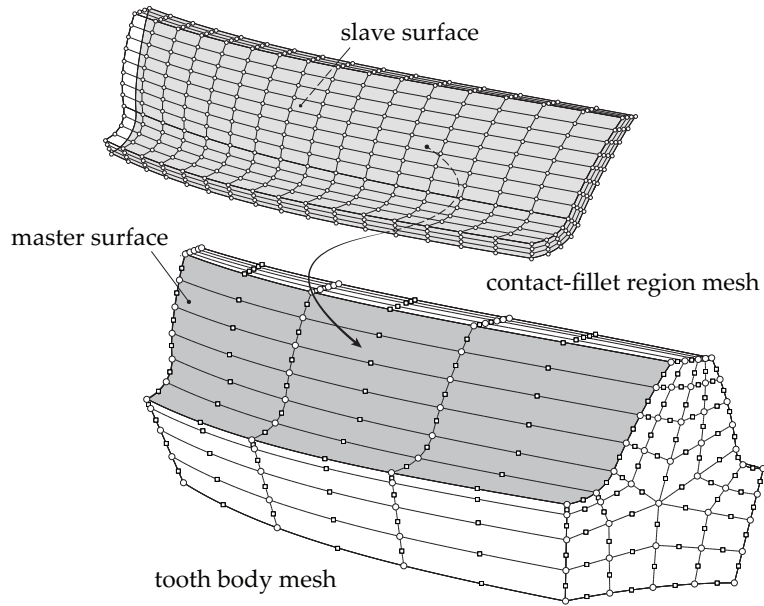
For illustration of the tie-surface constraint between the nodes of the slave surface and the master surface for one tooth of the gear model.
